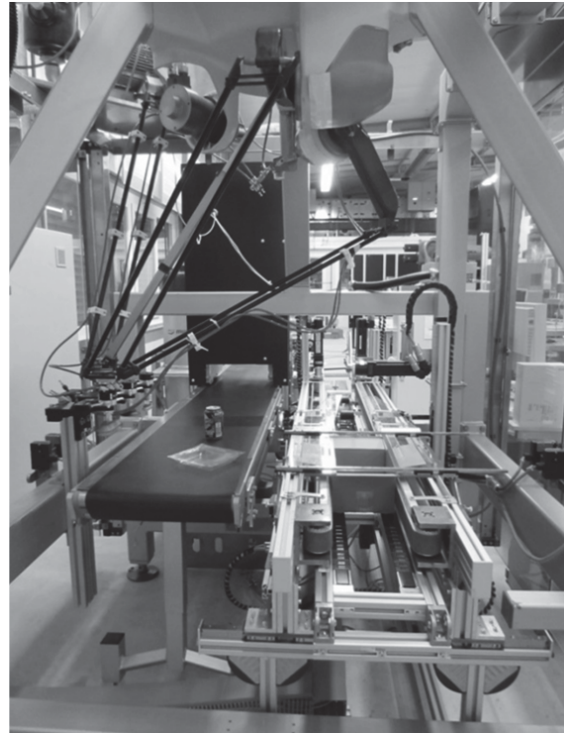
Demonstrator of a format-flexible case erecting, filling and closing packaging machine
